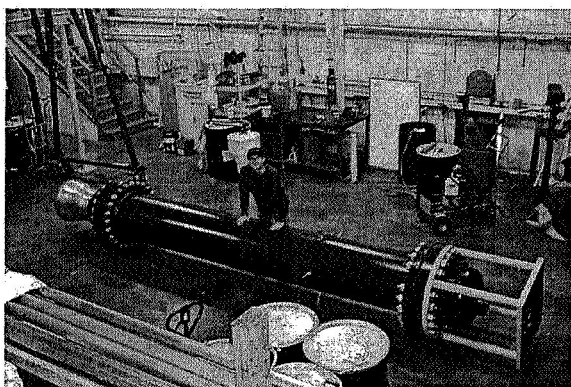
HYSR Completed heavyweight motor assembly¹⁴
